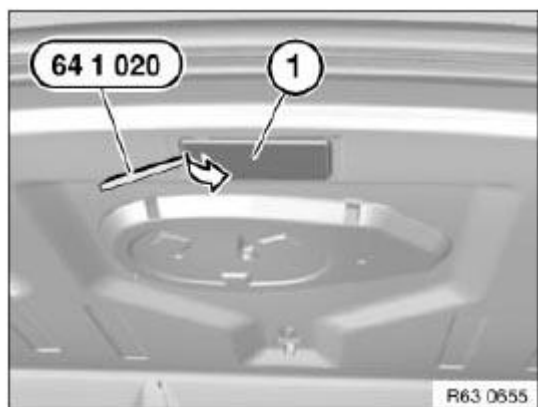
Identifying Special Tool (64 1 020) And Luggage Compartment Light (Under Rear Parcel Shelf)
